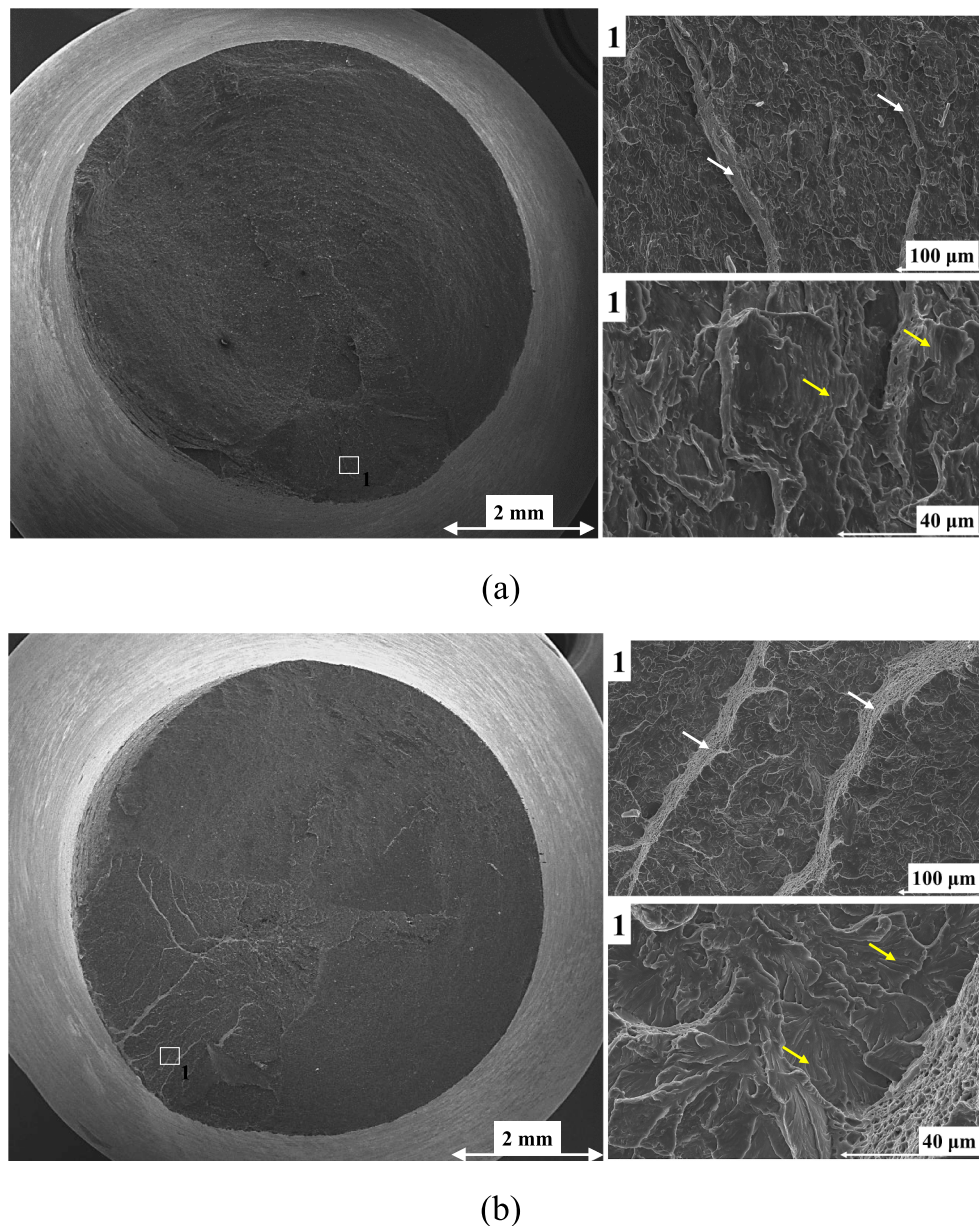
Fracture surface of ER70S-6 WAAM built specimens tested under torsion loading condition (a) for vertical, and (b) for horizontal specimens.
